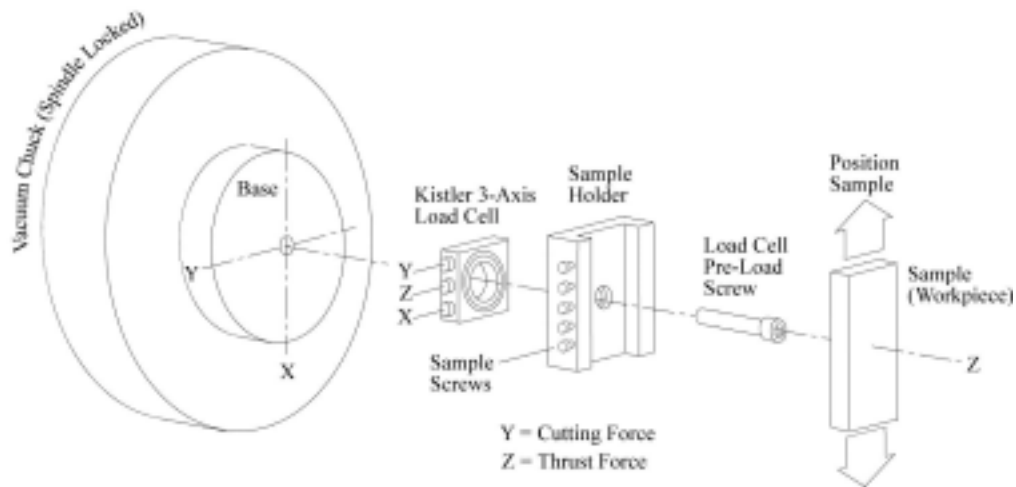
Exploded View of Sample Holder Used to Measure Cutting Forces
